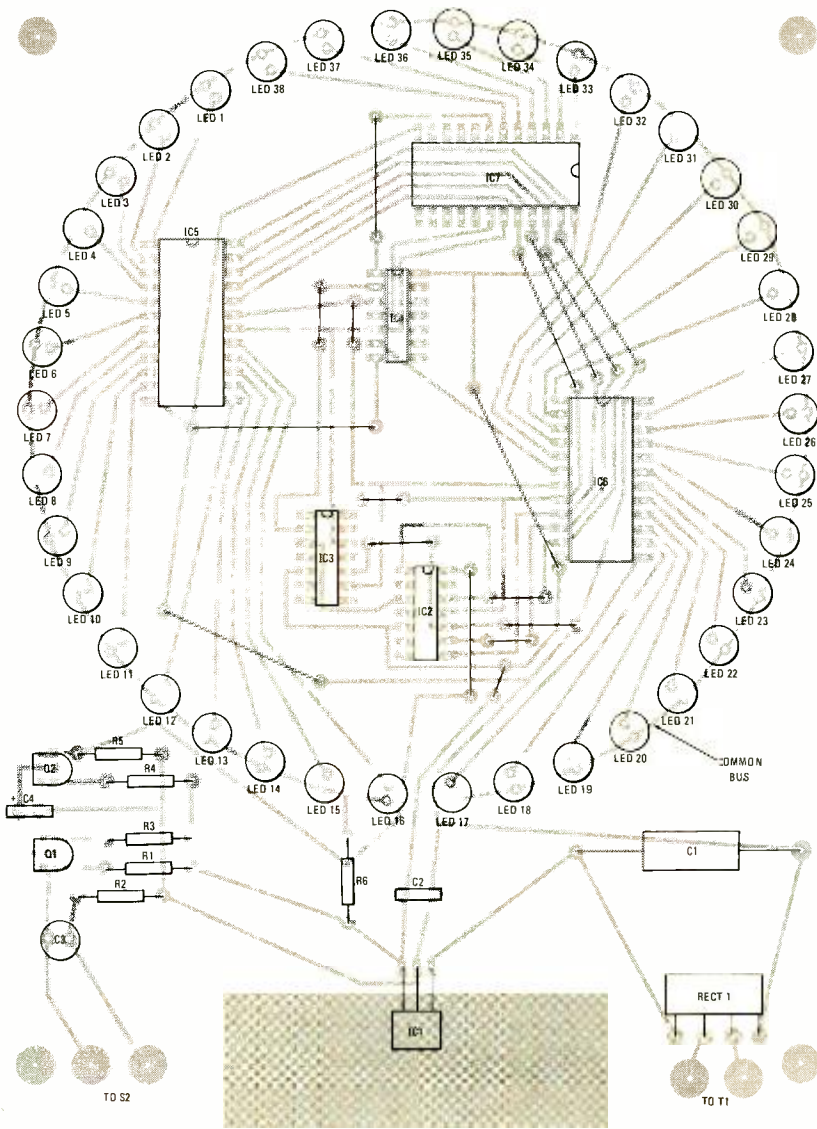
PARTS PLACEMENT shown from component-side of board. LED anodes connect to common bus.
